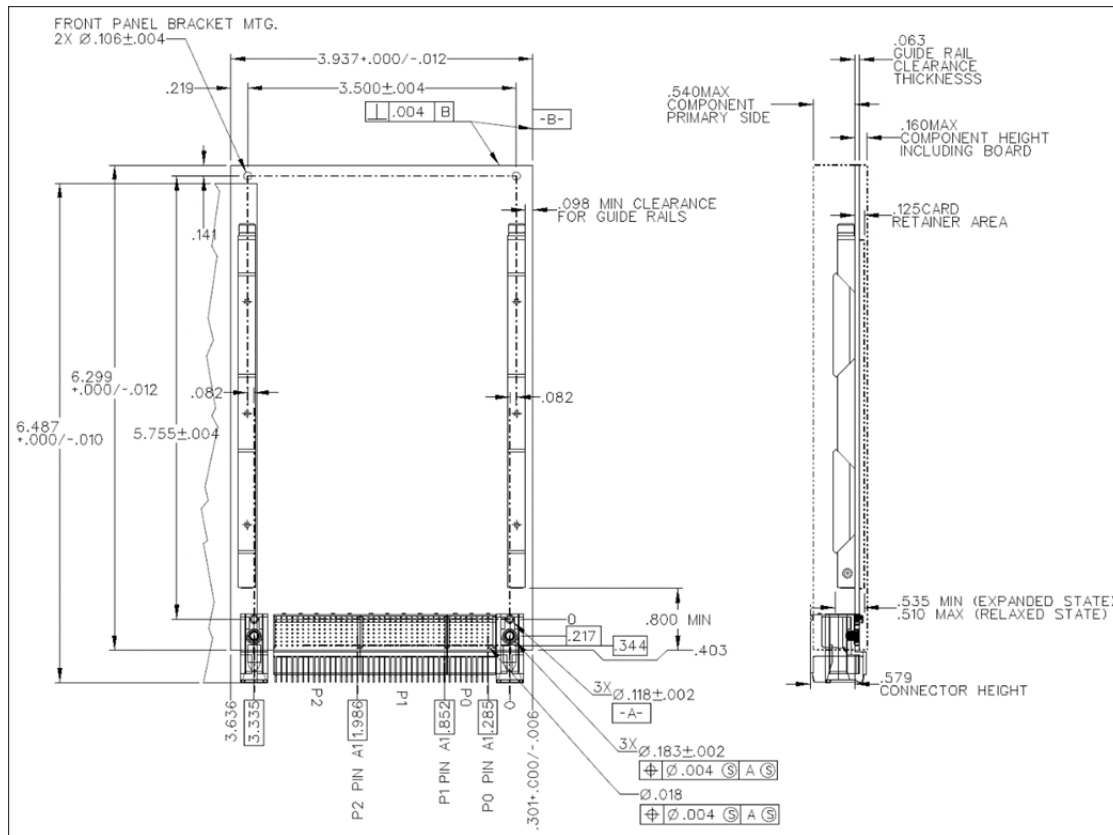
3U Module Layout with Connectors and Locating Pin Sockets
